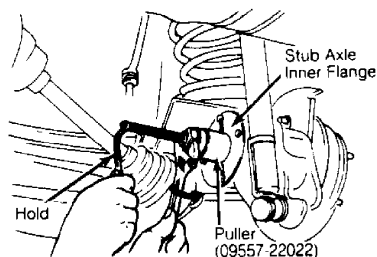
Removing Stub Axle Inner Flange (Cressida)
